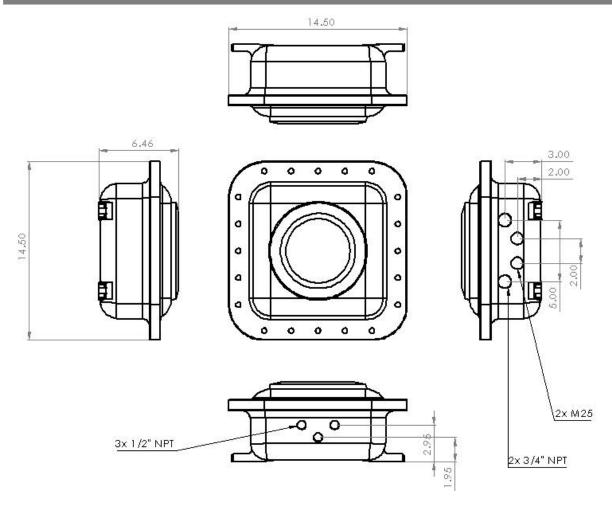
The analyzer box drawing (dimensions in inches)
